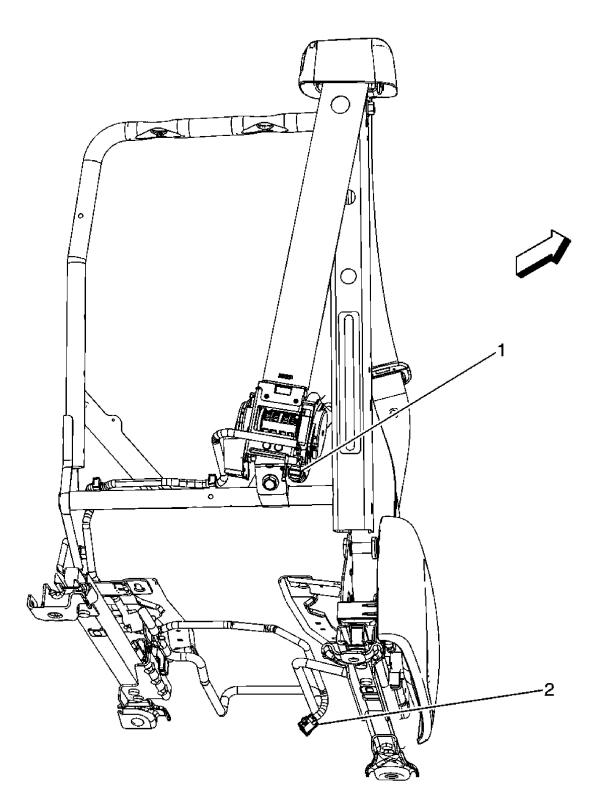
Seat Belt Pretensioner Harness Routing - Right Courtesy of GENERAL MOTORS CORP.
